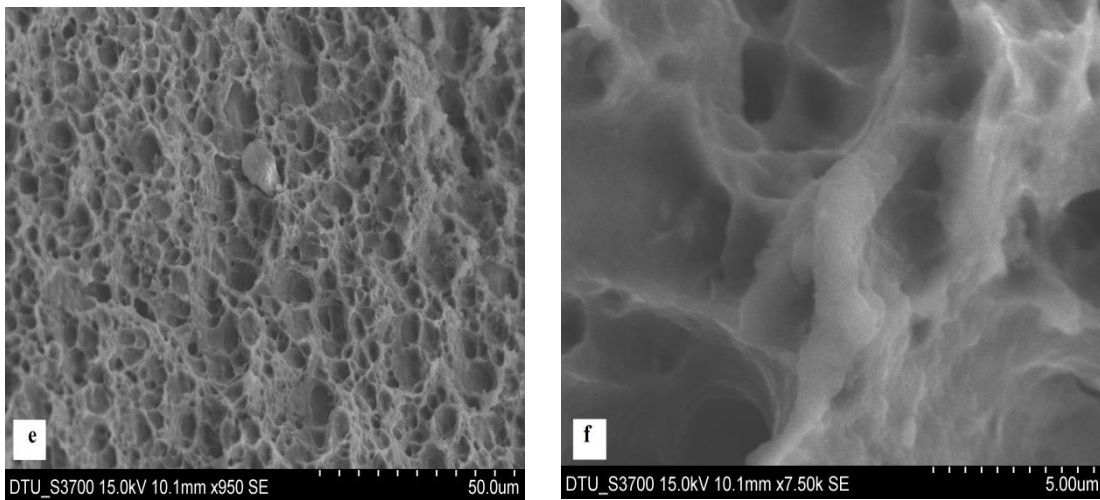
(e & f) FSPed two pass specimen tensile fractography (lower & higher magnification)
